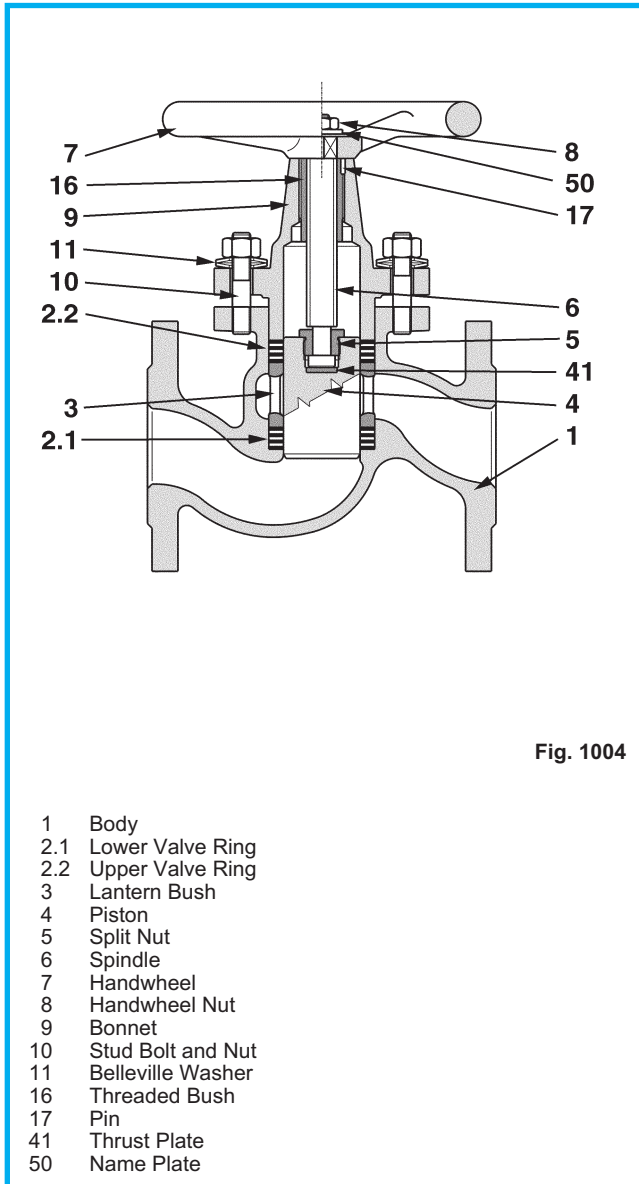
shows the basic design of a BONETTI® Piston Valve. The valve consists of a body (1), which is internally fitted with two sealing rings. The lower valve ring (2.1) ensures upstream/downstream seat tightness. The lantern bushing (3) is the spacer between the valve rings. The upper valve ring (2.2) ensures tightness to the atmosphere. The two valve rings are compressed by the bonnet (9), which is compressed by the stud bolts and nuts (10) and by the Belleville washers (11). The latter compensates for expansion due to temperature variations.
